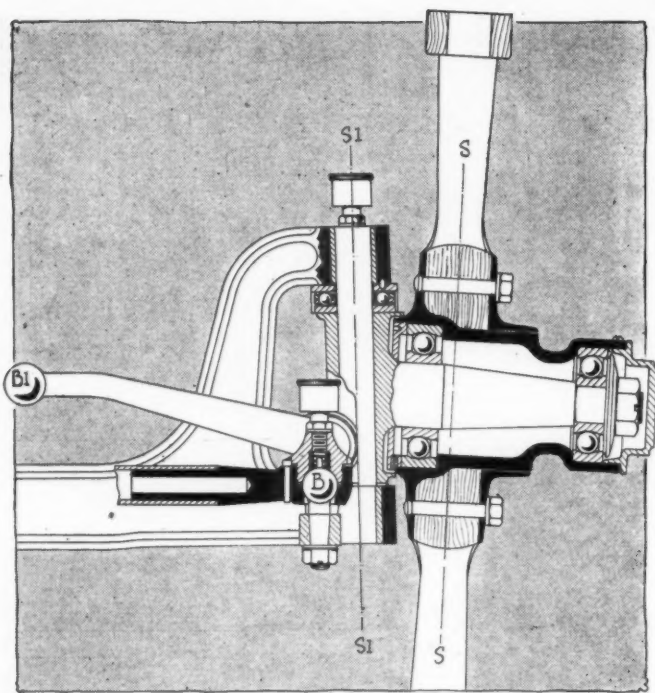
Ball bearing steering knuckle and spindle. Note wheel slope which is measured by the converging lines through the center of the steering knuckle and of the road wheel designed to give minimum tire wear and easy steering
